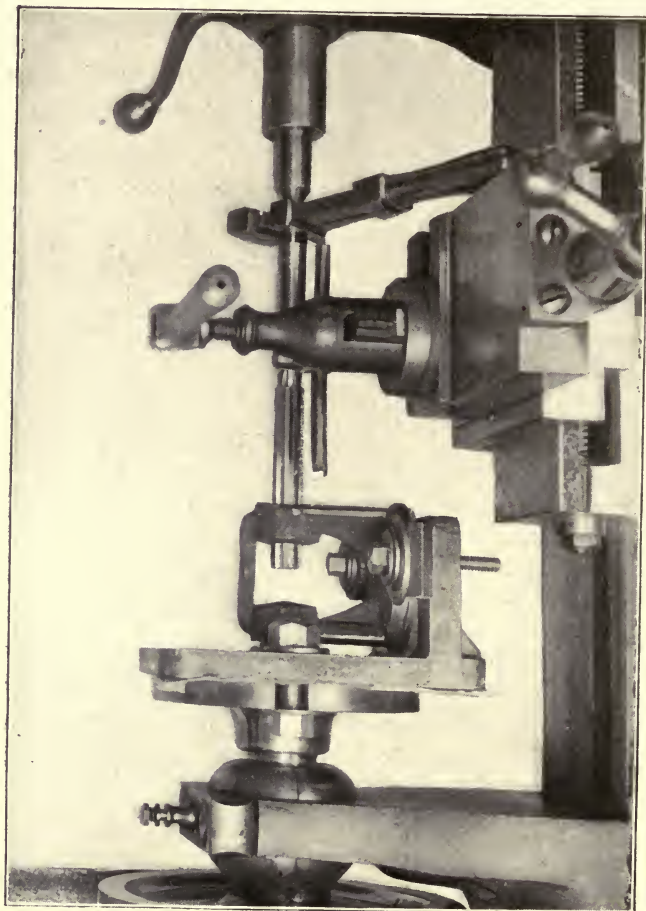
BORING AND REAMING PISTON FOR PISTON PIN.
